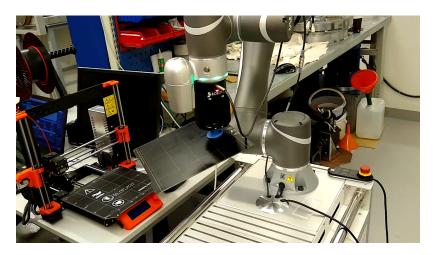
Lifting printing plate with vacuum gripper, first test
